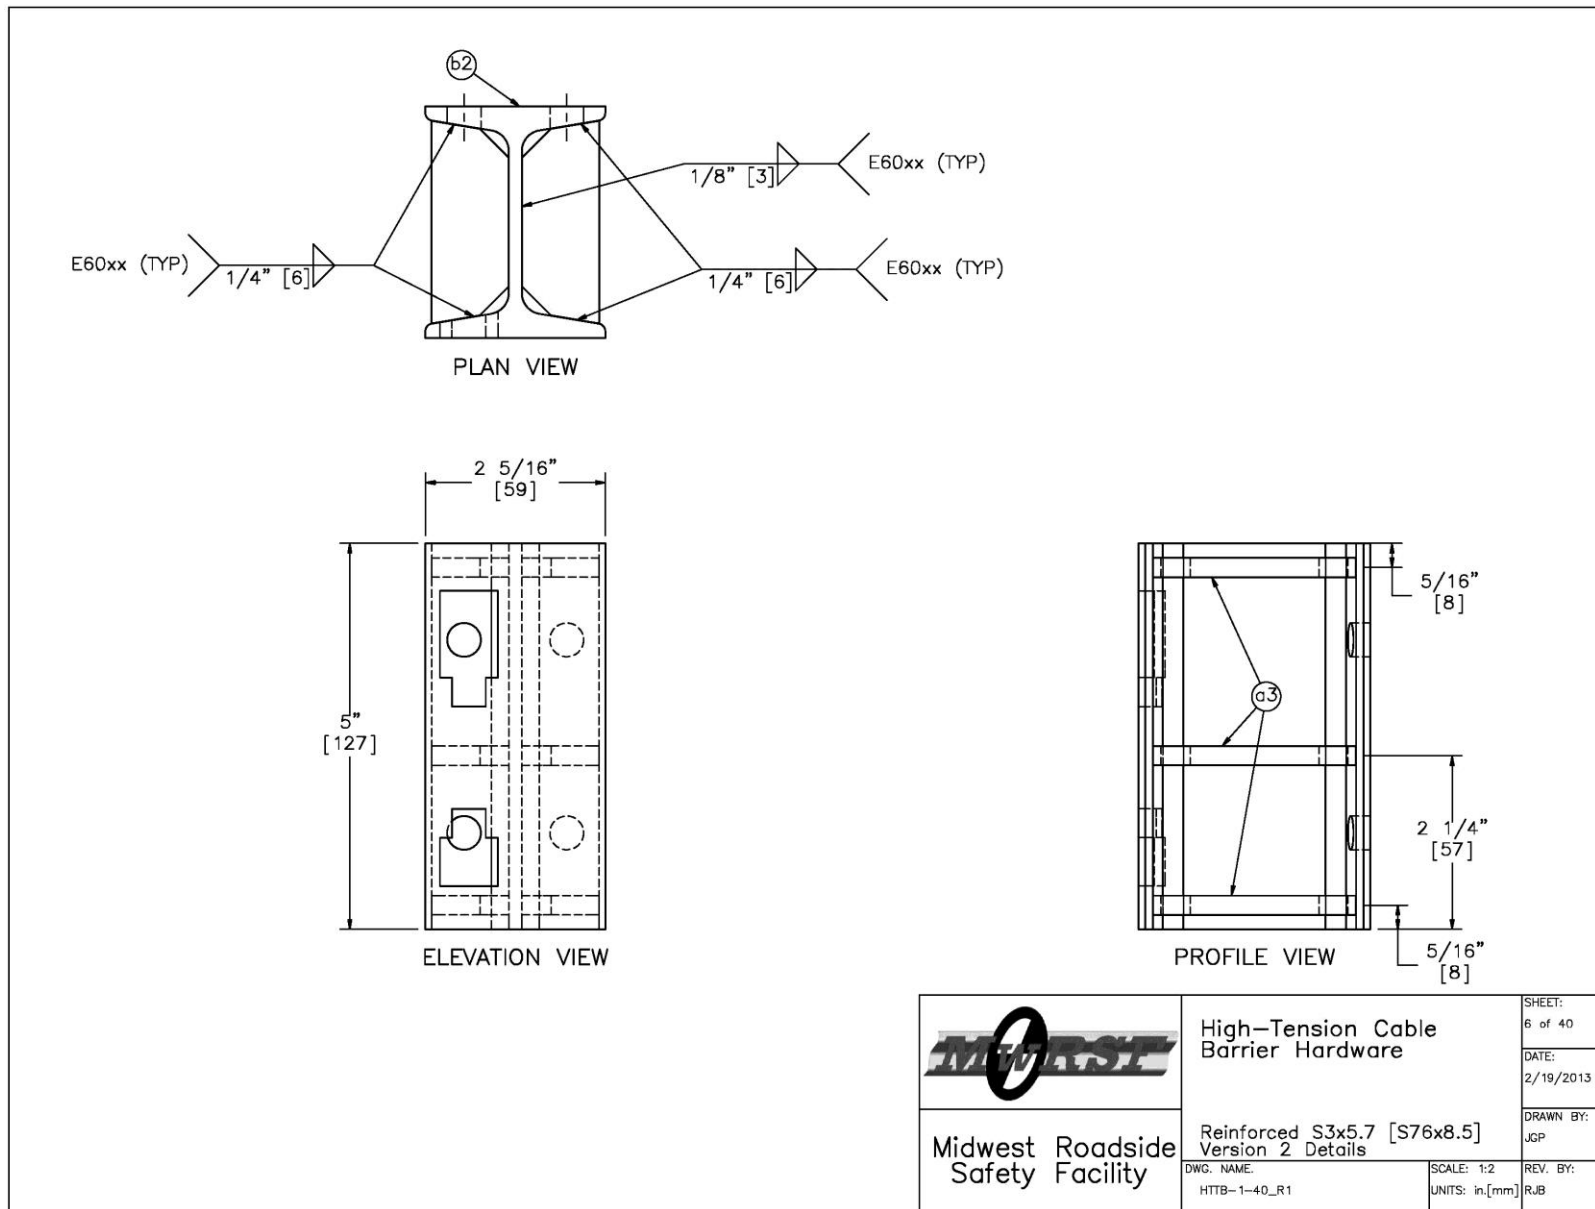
Reinforced S3x5.7 (S76x8.5) Section Version 2 Details, Test Nos. HTTB-1 through HTTB-40
